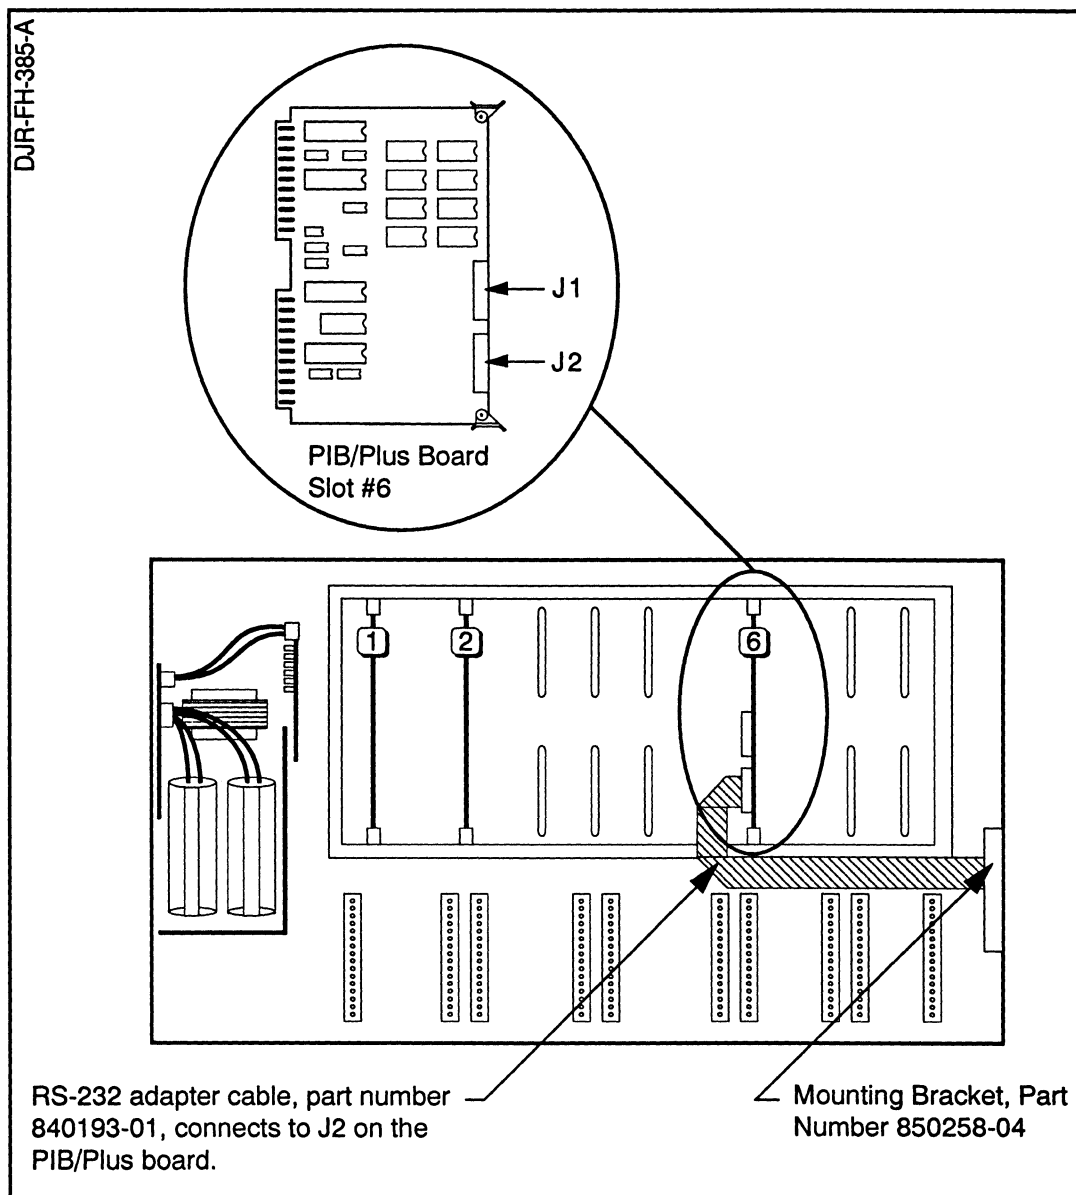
PIB/PLUS BOARD AND RS-232 INSTALLATION
